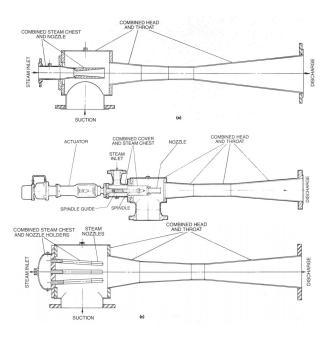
Steam-jet and gas-jet ejector: (*a*) single-nozzle; (*b*) variable-area (spindle) nozzle; (*c*) multiple-nozzle. (*Courtesy Croll-Reynolds Co., Inc.*)
